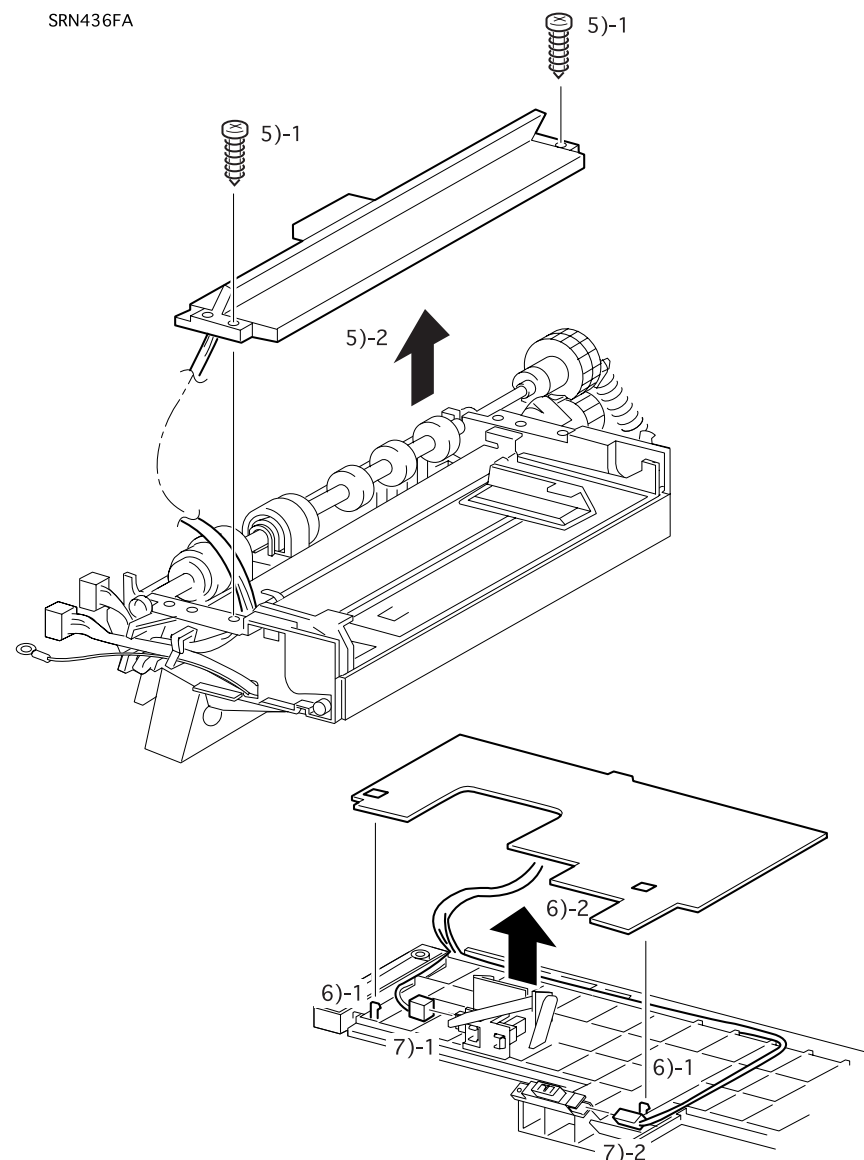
MSI TOP COVER ASSEMBLY Removal
